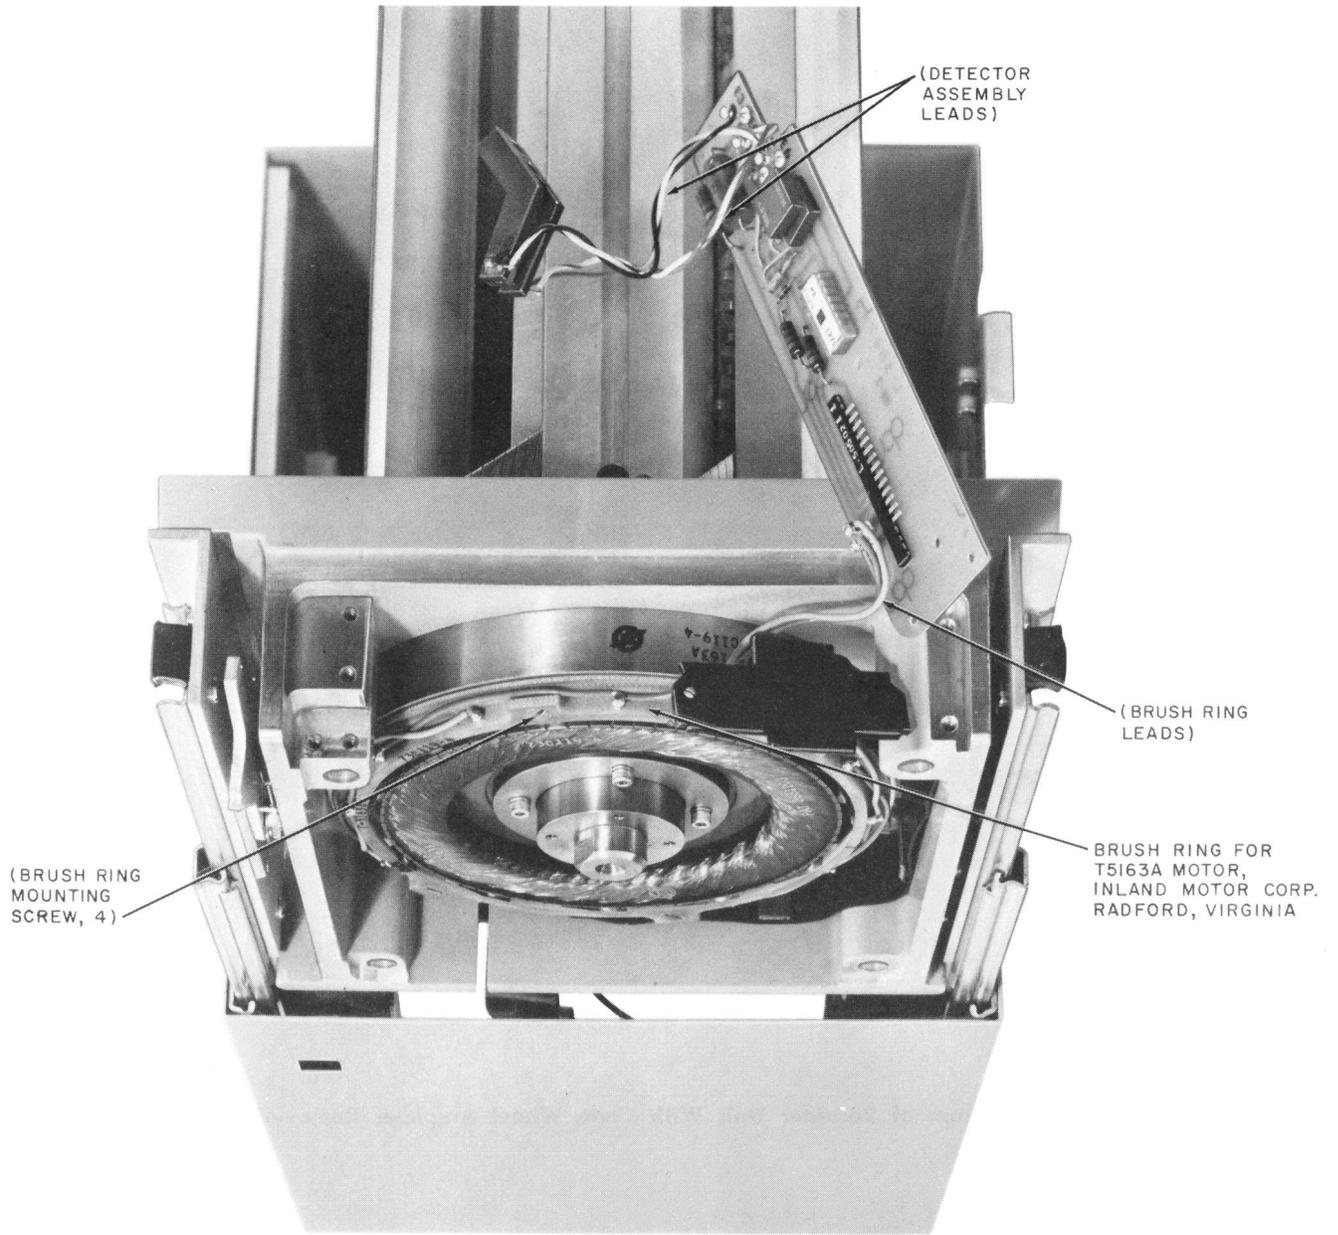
Bottom of Recorder Unit With Code Wheel Removed
